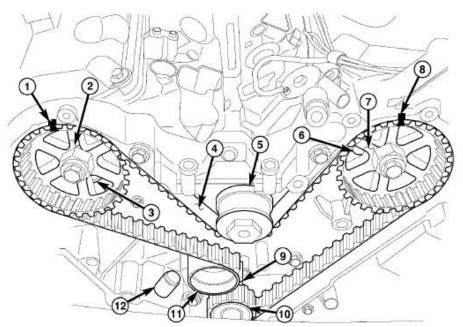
Timing Gear Components Courtesy of CHRYSLER LLC
